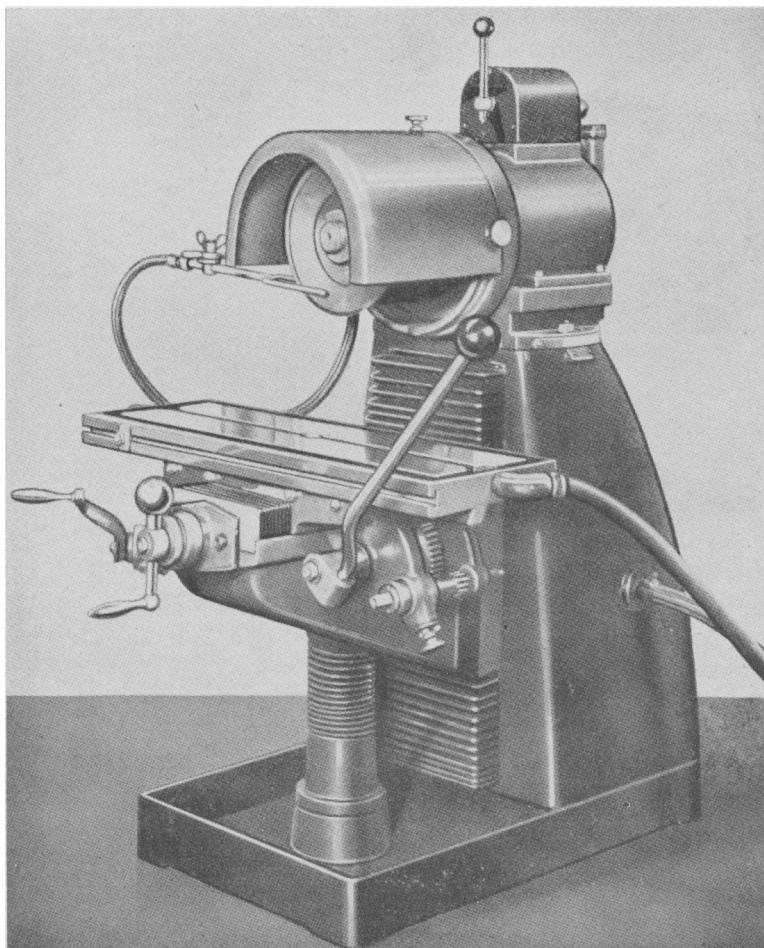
The G.F.3 surface grinding machine. Overall height 31 inches; table space required 30×30 inches.
